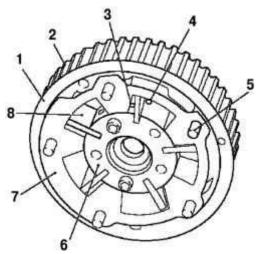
Regulator camshaft drive intake valves: 1 - separating disk (external) - the regulator camshaft drive intake valves, 2 - toothed belt pulley 3 - channel fill and drain - the camera "A" 4 - channel fill and drain - the camera "B"; 5 - screw pin - Lid regulator of camshaft 6 - rotor is rigidly connected to the camshaft; 7 - stator can be moved hydraulically, 8 - separation chambers "A" and "B"
